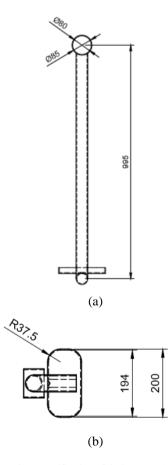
Dimensions specification of design part: (a) foot handle and (b) footrest.
